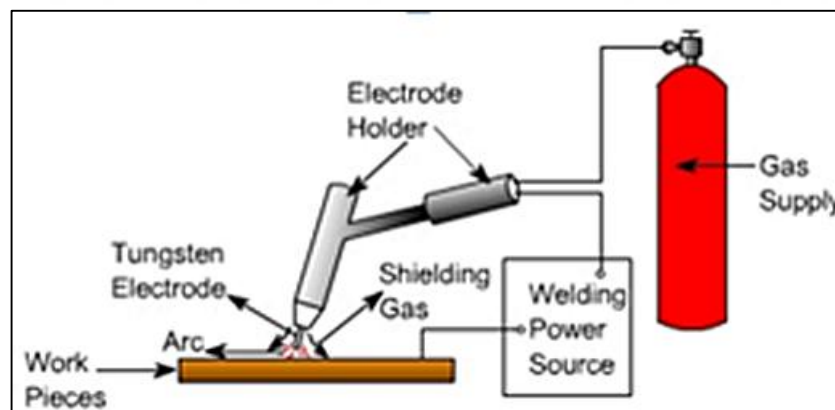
Schematic diagram of TIG welding system.
